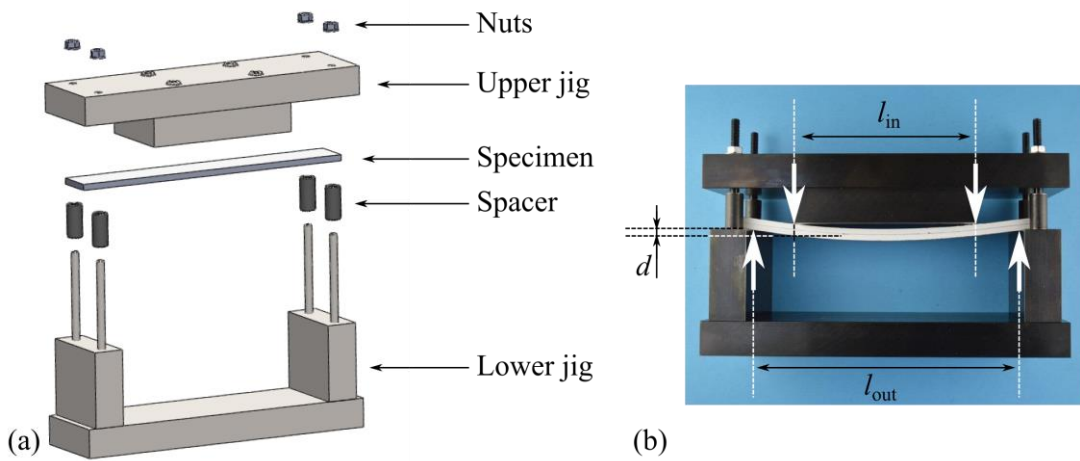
Four point bending jig (a) schematic illustration with each part separated, (b) side view of the jig when the specimen is set.
